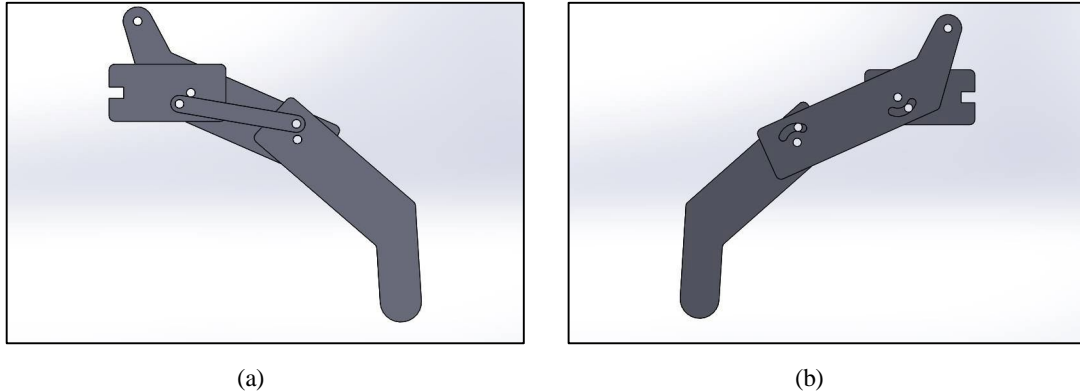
Finger design of type 2; (a) left hand side view, (b) right hand side view
